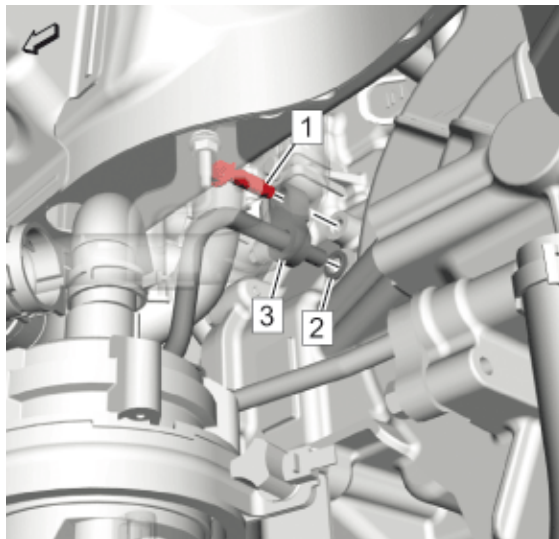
Transmission Fluid Cooler Inlet Pipe, Bolt And Sealing Washer
